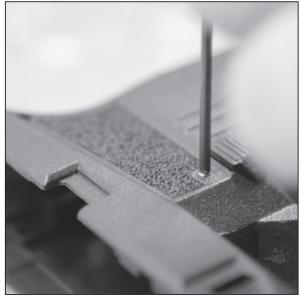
Using the punch to seat the magazine catch axle centered in the frame
